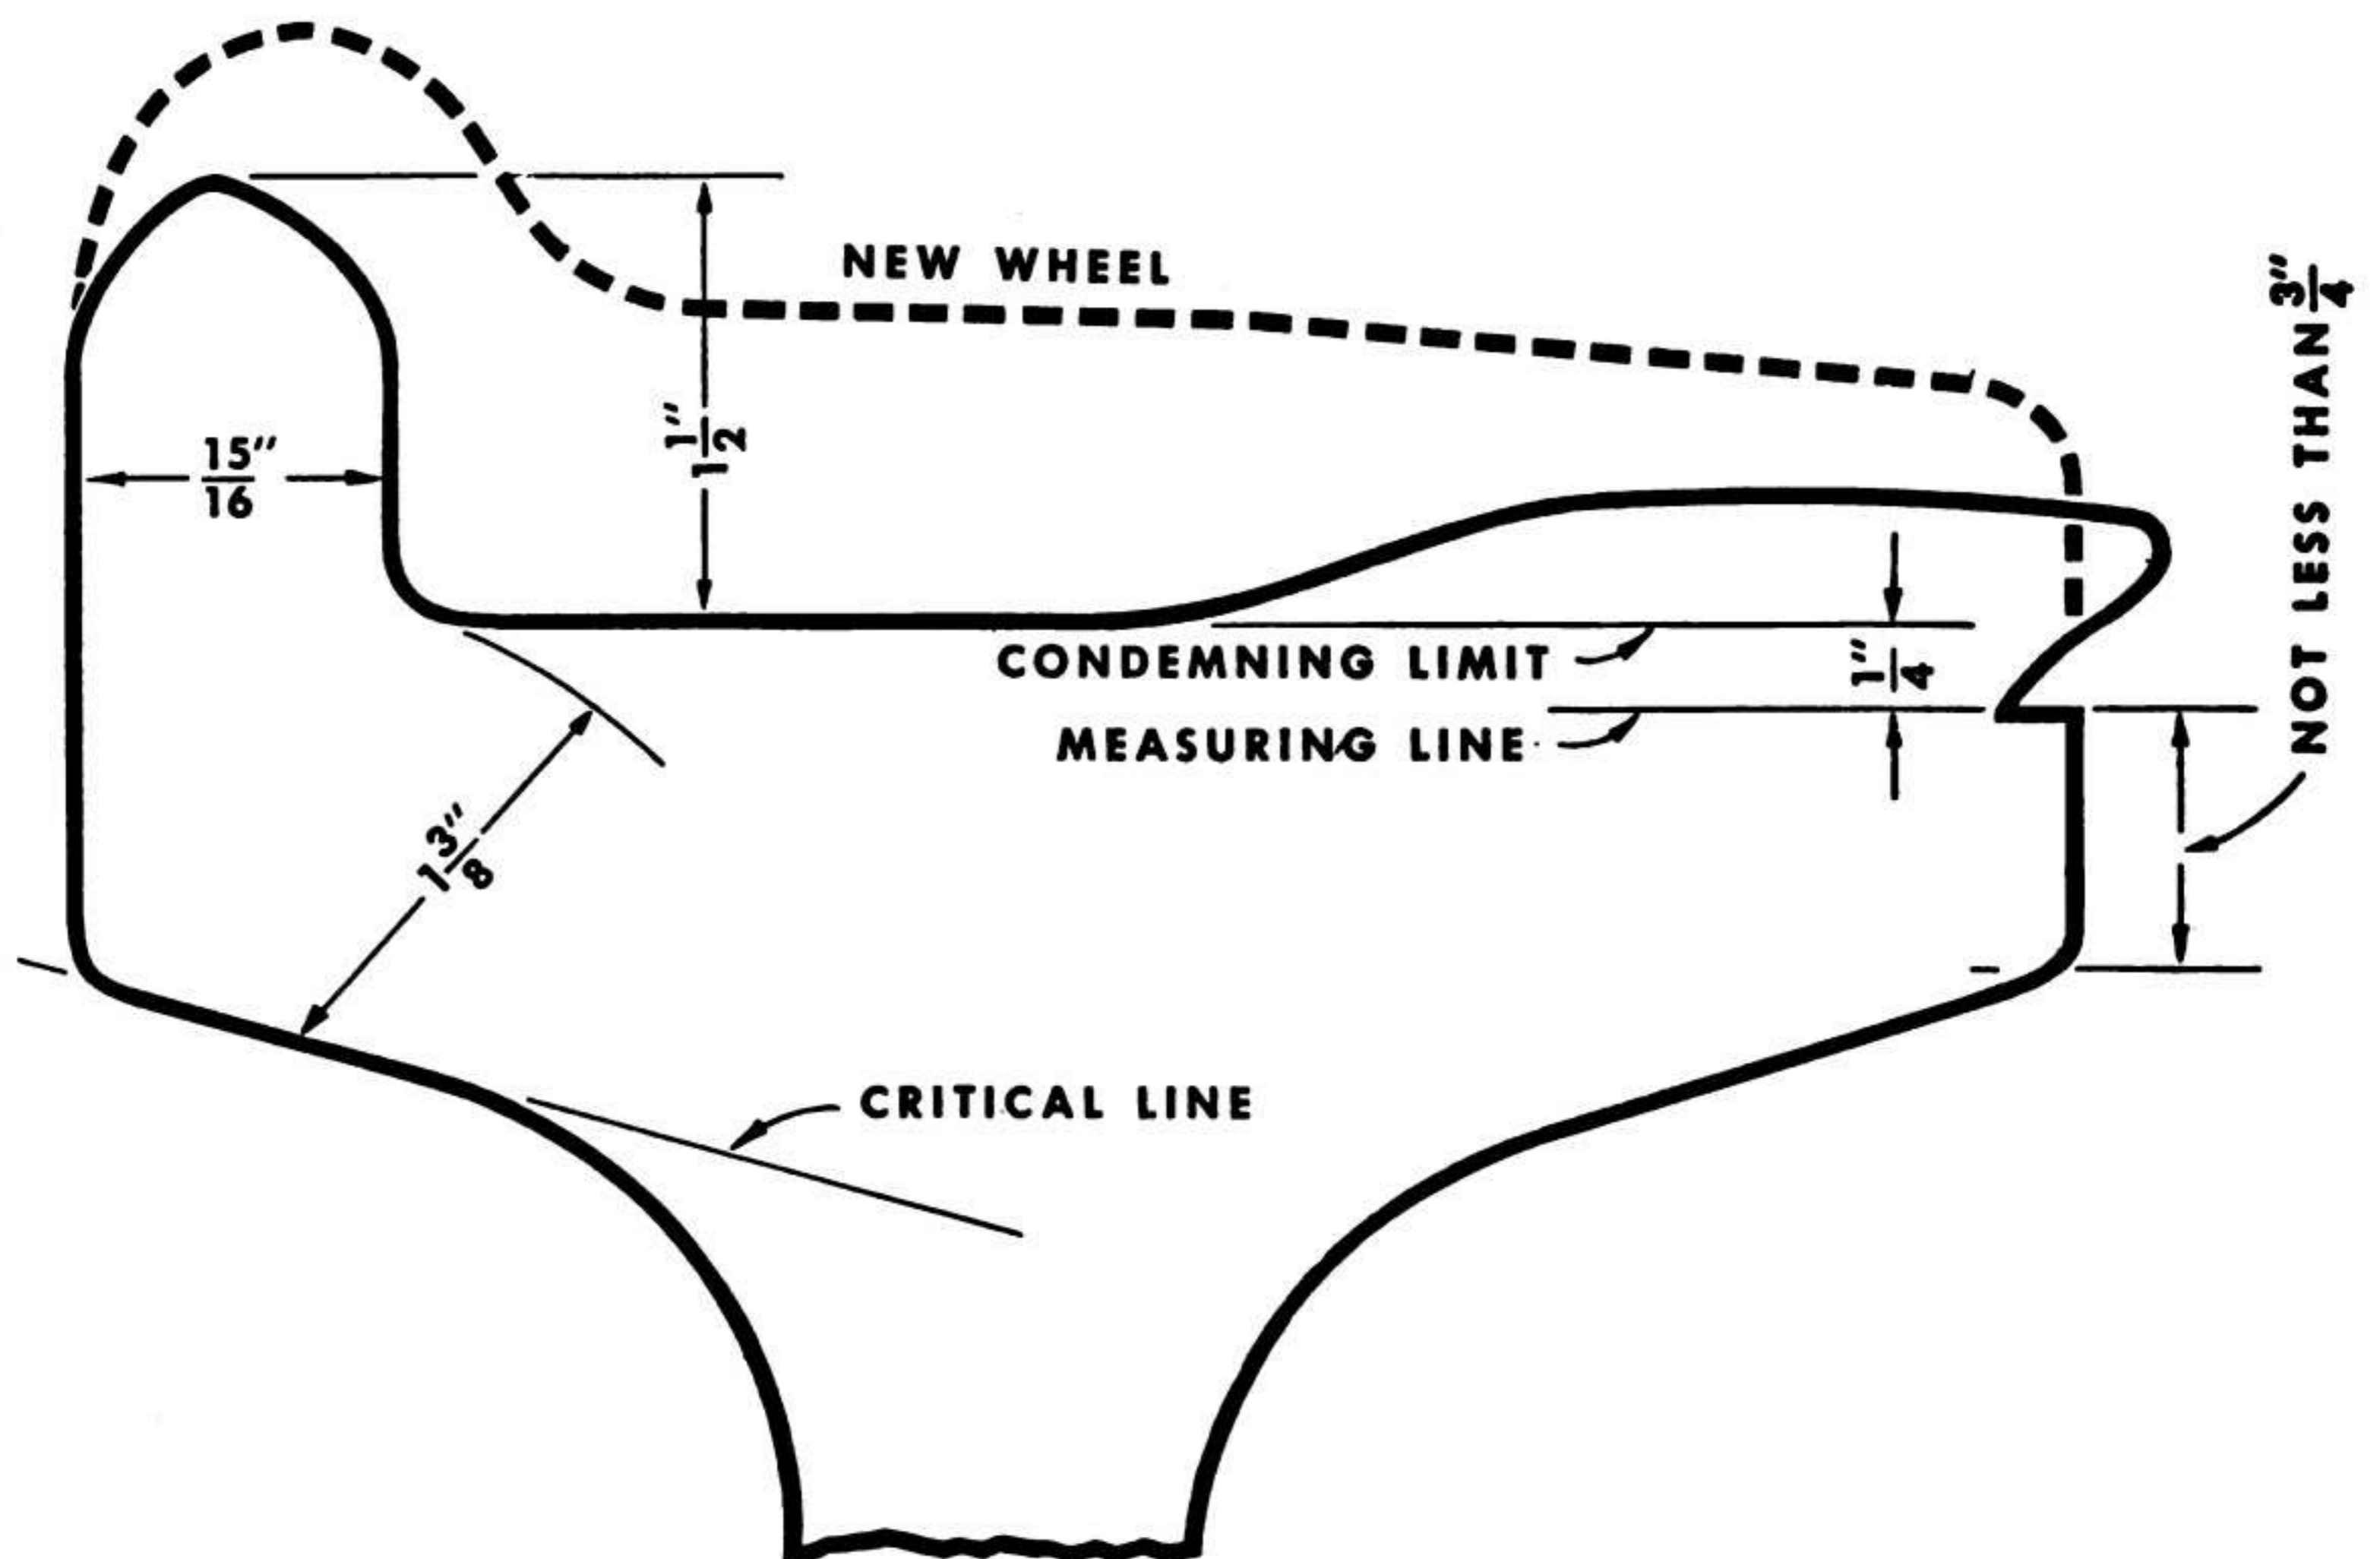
Steel wheel minimum thickness of rim. Engine and tender truck wheels. (See Rule No. 80.)
